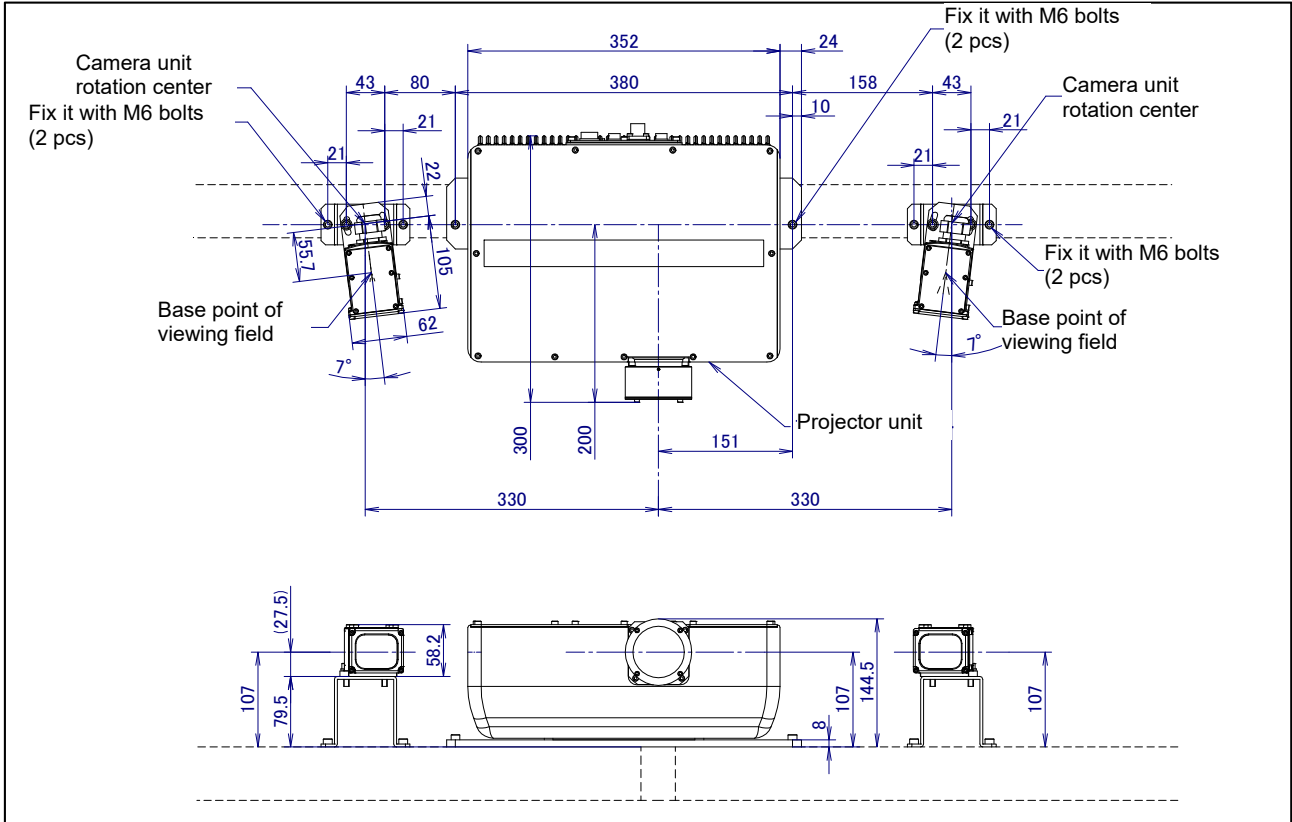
(a) External dimensions of 3D Area Sensor (3DA/1300)
